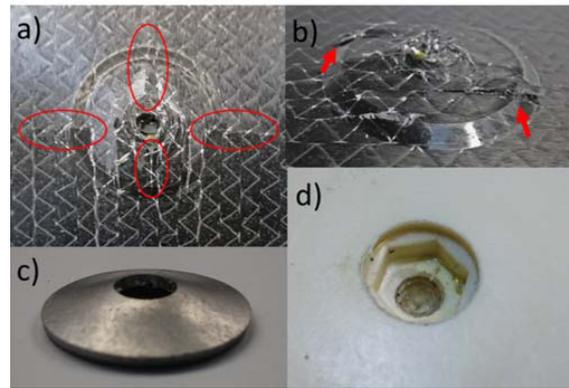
exemplary pictures of the failed specimens. a) crosswise cracks going out from the insert bolt; b) delamination and fiber cracking going out from the outer area of the metal plate; c) plastic deformation of the metal plate after the pull out test; d) hole in the foam core where the flange nut was foamed in
